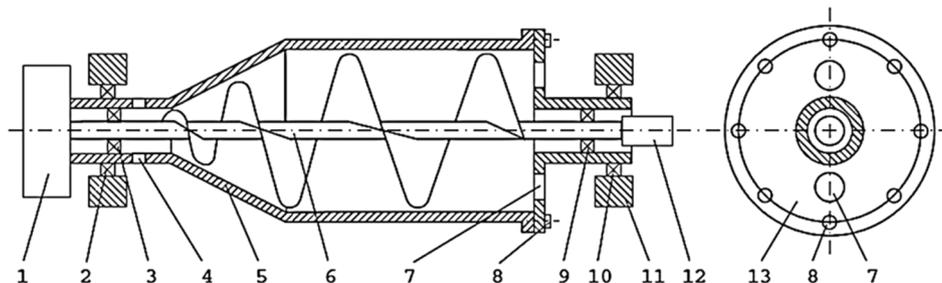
Sketch of a spiral centrifuge adapted from [11]. 1. Gear box reducer; 2. Ball bearing; 3. Ball bearing; 4. Solid outlet; 5. Outer drum rotor; 6. Inner spiral rotor; 7. Liquid outlet; 8. Fixing bolt; 9. Ball bearing; 10. Ball bearing; 11. Bearing housing; 12. Extension part of inner rotor; 13. Right end of drum.
